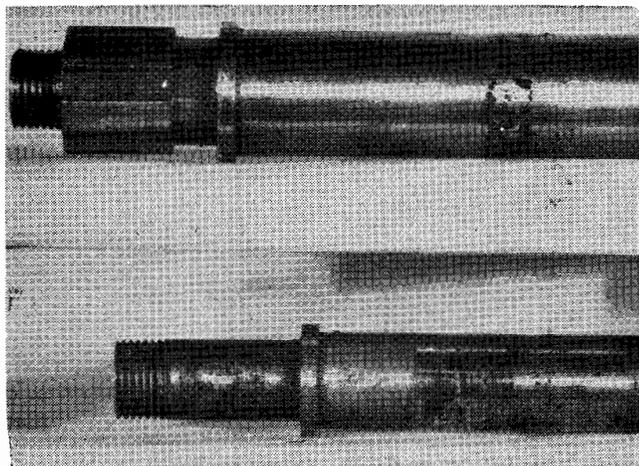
Better design of packing glands and stuffing boxes, as well as pump and shaft arrangements on mixing apparatus, have reduced the frequency of corrosion problems such as those shown here on shafts from earlier machines. Periodical check and replacement of packing materials is advised.
